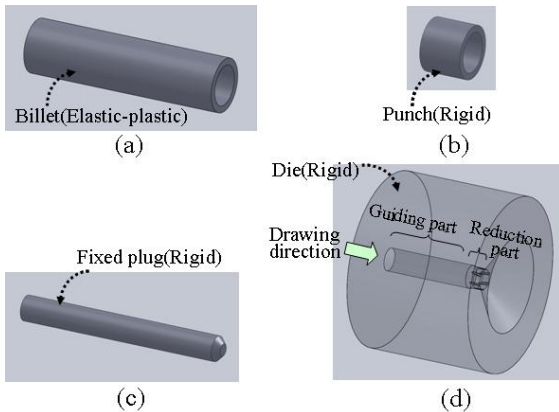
Components used for FE analysis of tube drawing process: (a) billet, (b) punch, (c) plug, and (d) die
